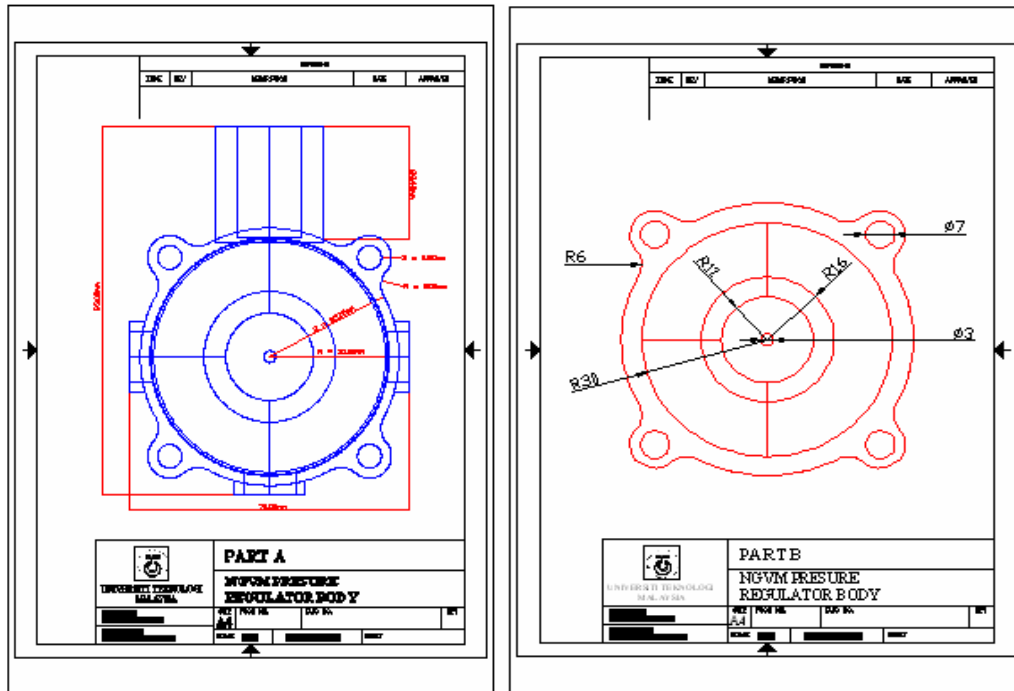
Two Dimensional Drawing of Part A and Part B
